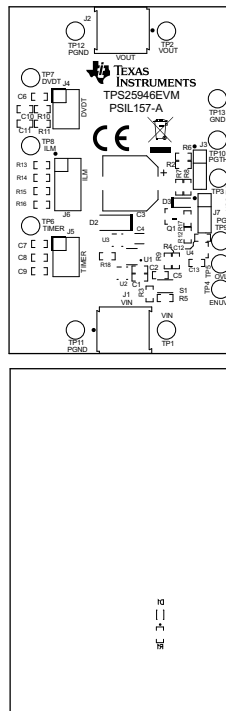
TPS25946EVM Board (a) Top Assembly (b) Bottom Assembly
